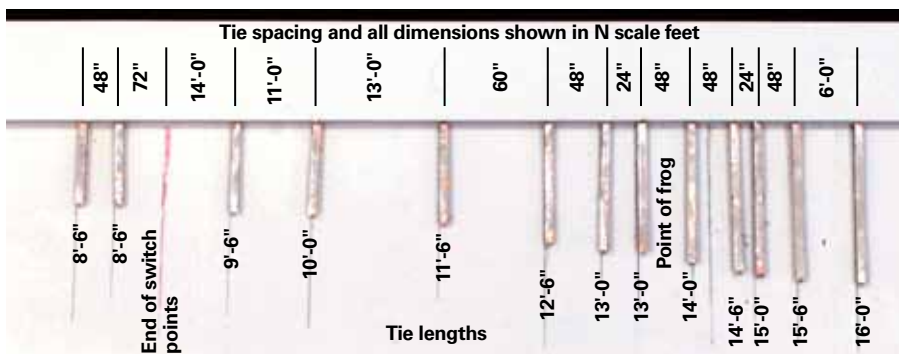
Assembly jig. A piece of wood with a strip of .060" styrene mounted along one edge serves as a jig to hold the PC ties in place during the soldering.
